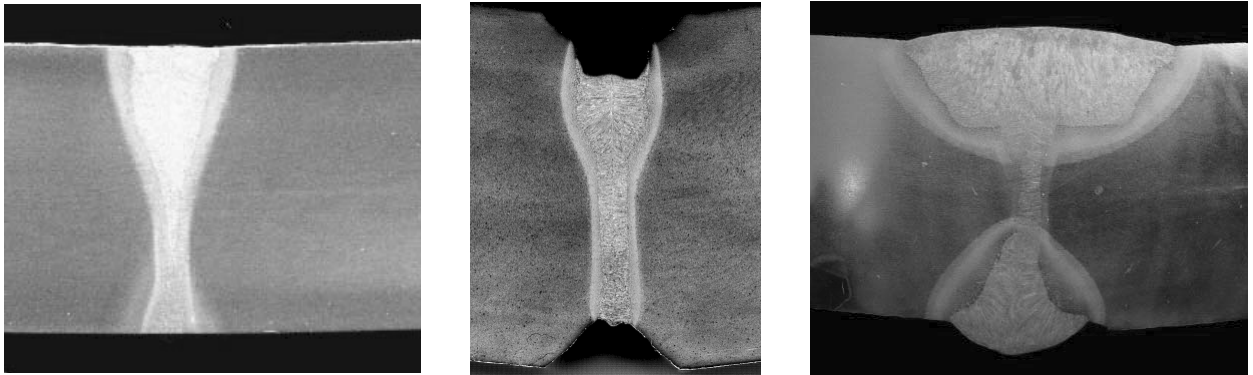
Macro section of the one pass weld (left), and three passes weld (center – first technological pass, right – technological pass and two filled passes by submerged arc welding. Depth is 15 mm left and 24 mm center and right. Material is pipe steel X 80.
